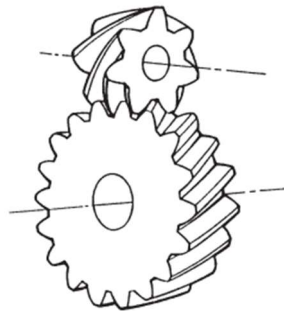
SCREW GEARS USING CROSSED HELICAL GEARS, SOURCE: SDP/SI (2018), P. 1
